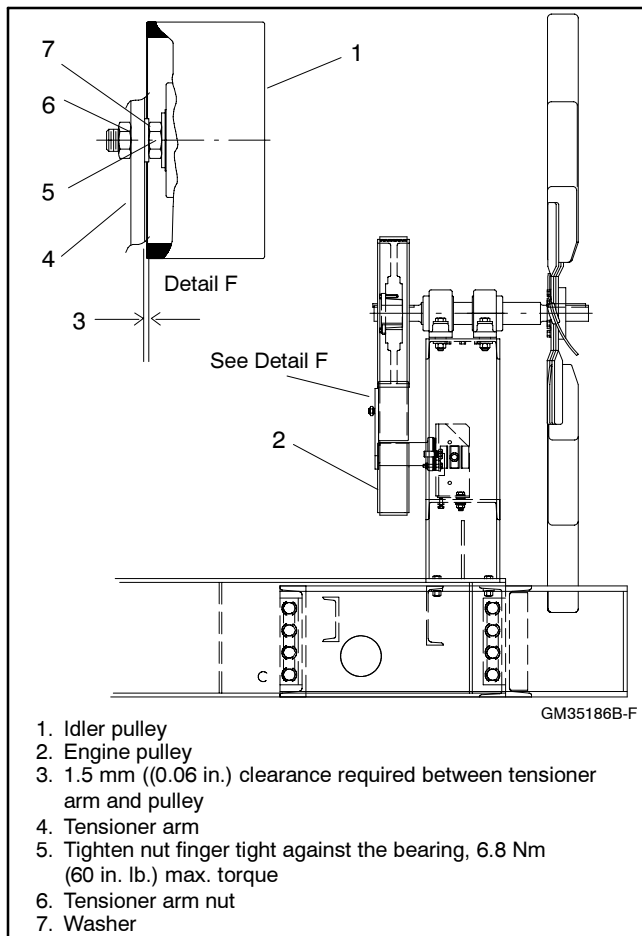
Idler Pulley Arm and Pulley Assembly
